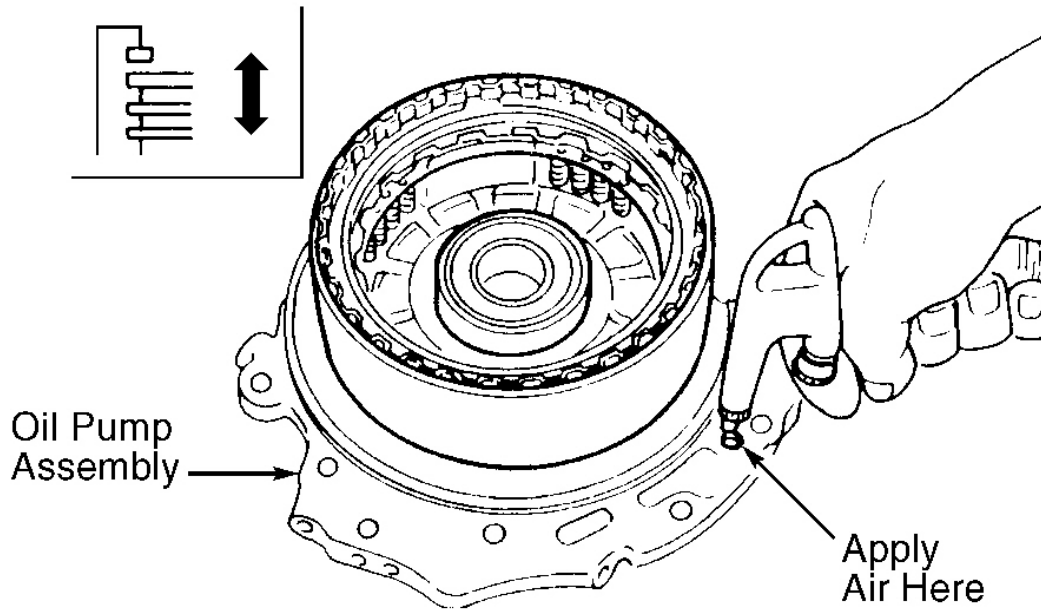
Measuring Clutch Pack Clearance (Reverse Clutch Shown; Others Are Similar)
